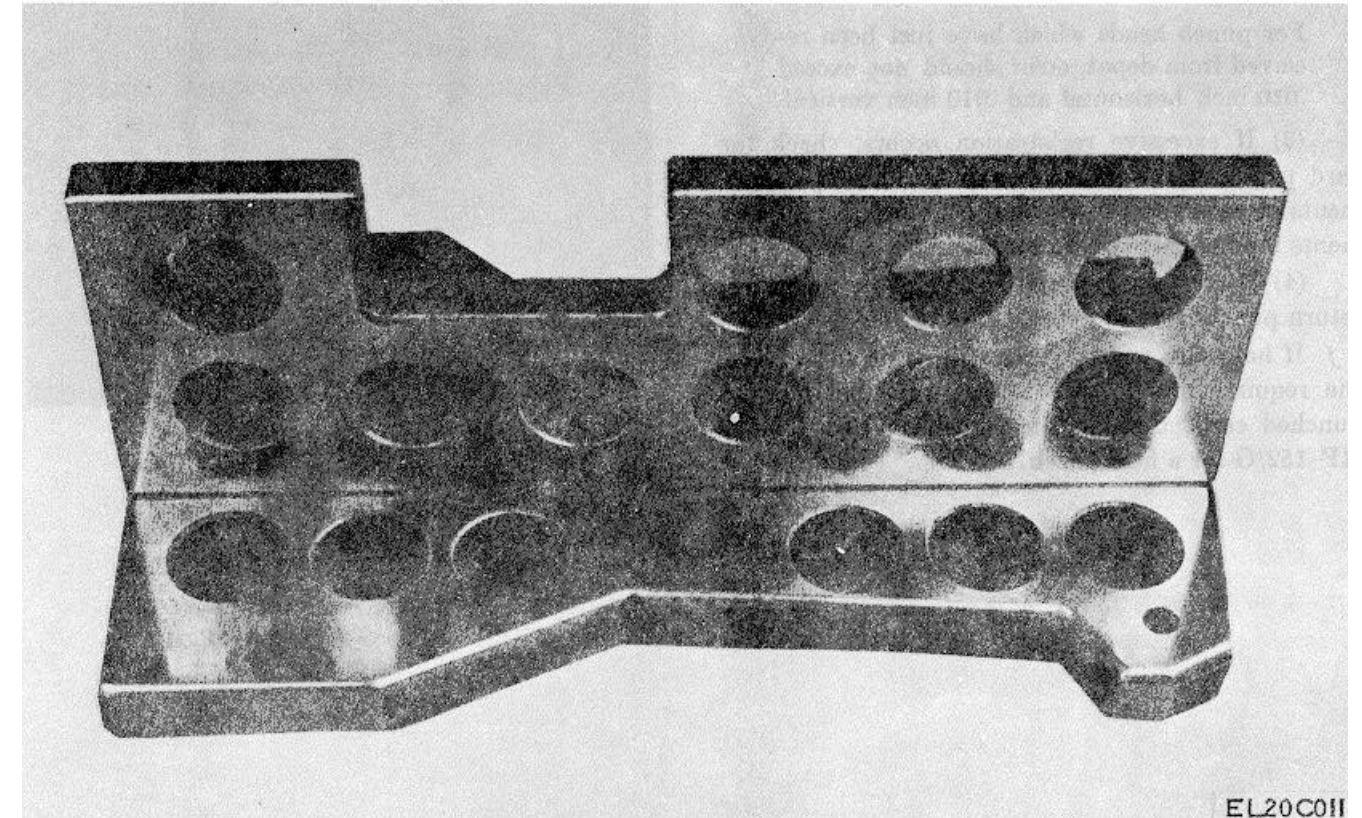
Picker alignment fixture (No. ATE-D-0813)
